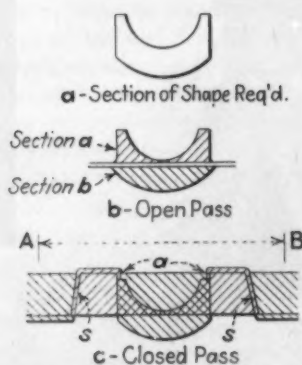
Section of shape (a) required, with open (b) and closed (c) passes necessary.
